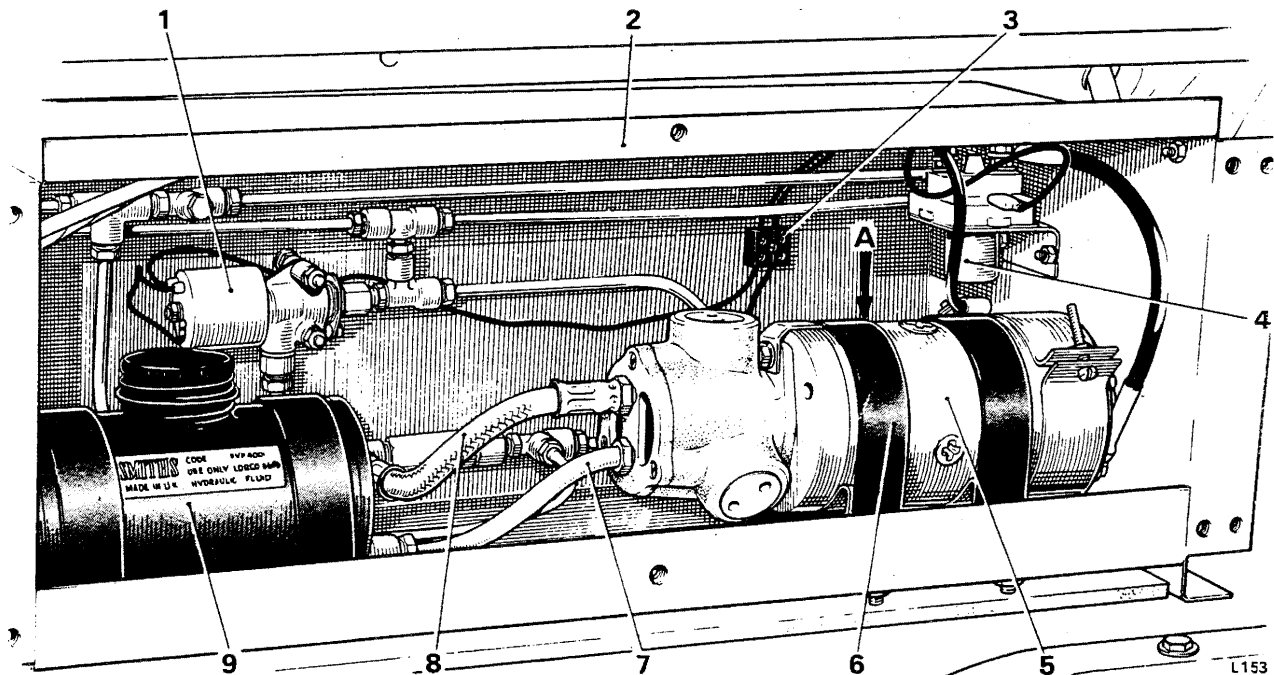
ELECTRICALLY OPERATED HOOD COMPONENTS IN POSITION
